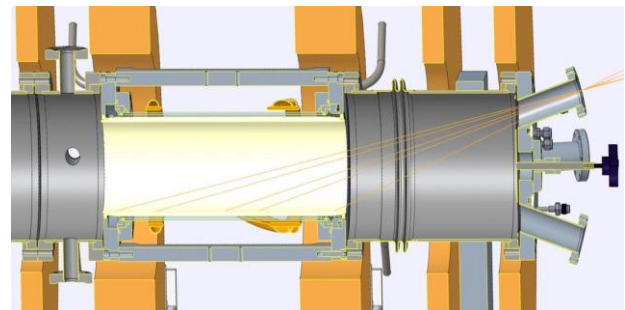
CAD model showing a cross section of the new DI-water cooled RF source assembly, along with the end flange with the angular viewports for IR imaging of the inner ceramic surface.
